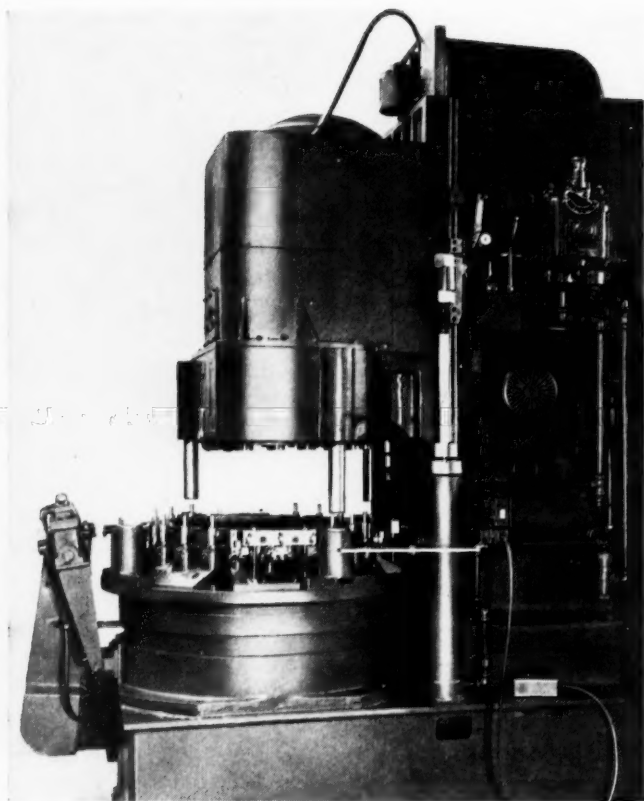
A Baker Bros. Multiple-head Boring Machine Equipped with Automatic Lubrication for the Sliding Head
